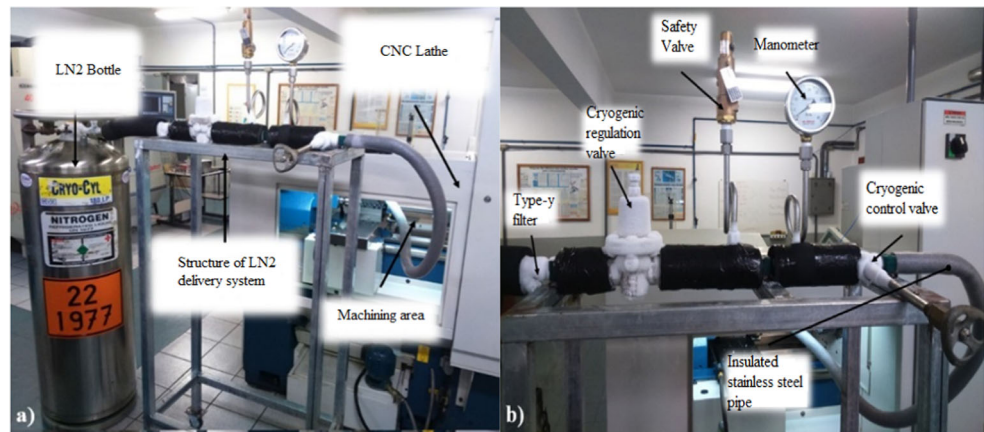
Set-up of the cryogenic cooling system. a Equipment adapted to the CNC lathe and b components used in the cooling system
